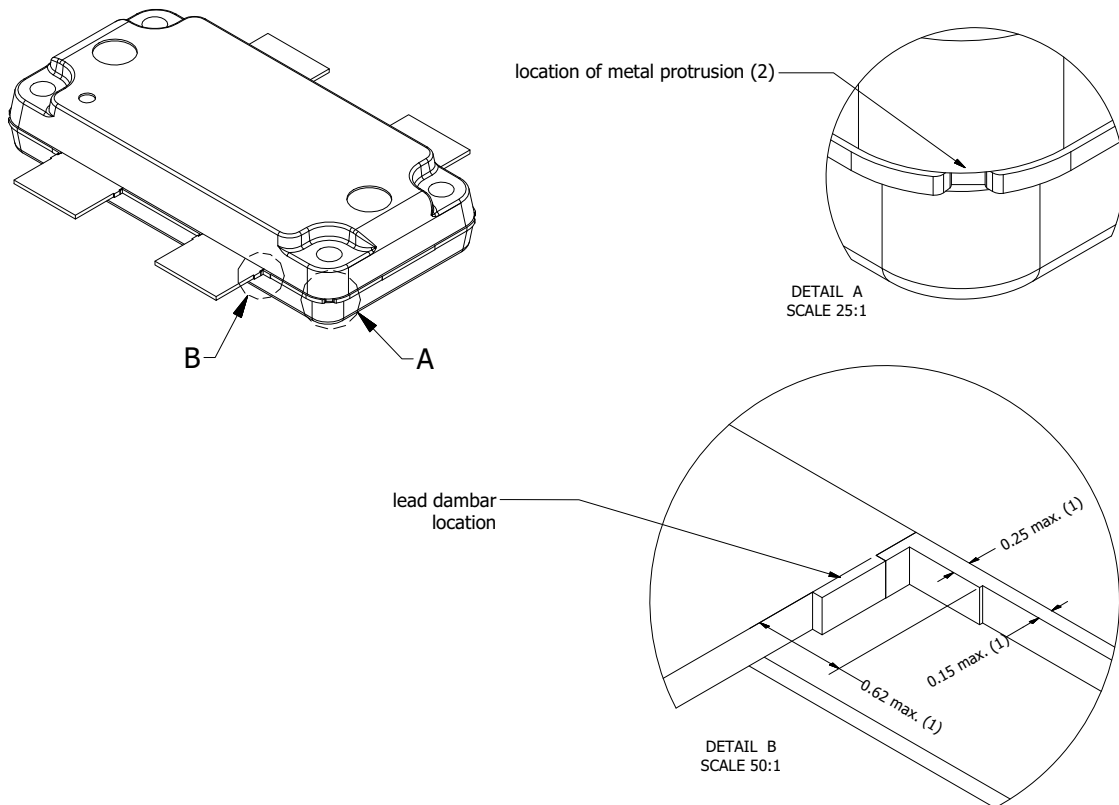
Package outline OMP-780-4F-1 (sheet 1 of 2)
